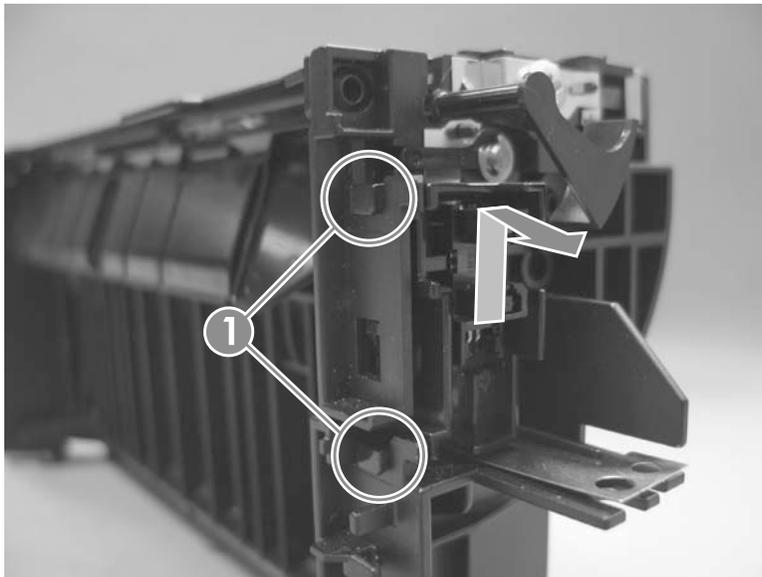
Reinstall the delivery assembly (M651: 3 of 4)
